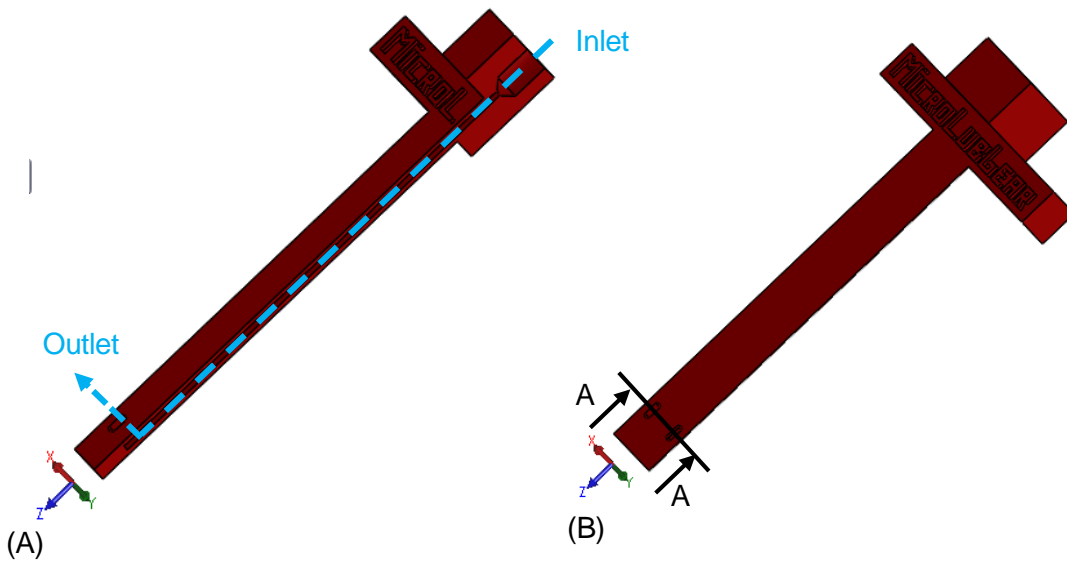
(A) MiCRoLuBGear symmetrically cross section through the lubrication channel.
